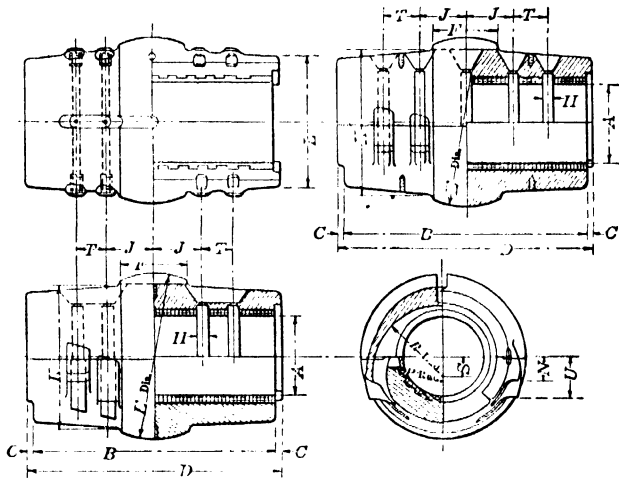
Dimensions of ball and socket, ring-oiled bearings.
